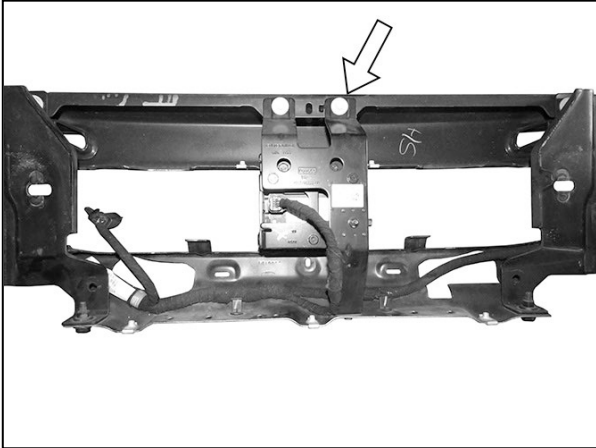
Push Edge Trim onto both ends of Bumper. Cut Edge Trim to fit. Note sensors and harness also installed
